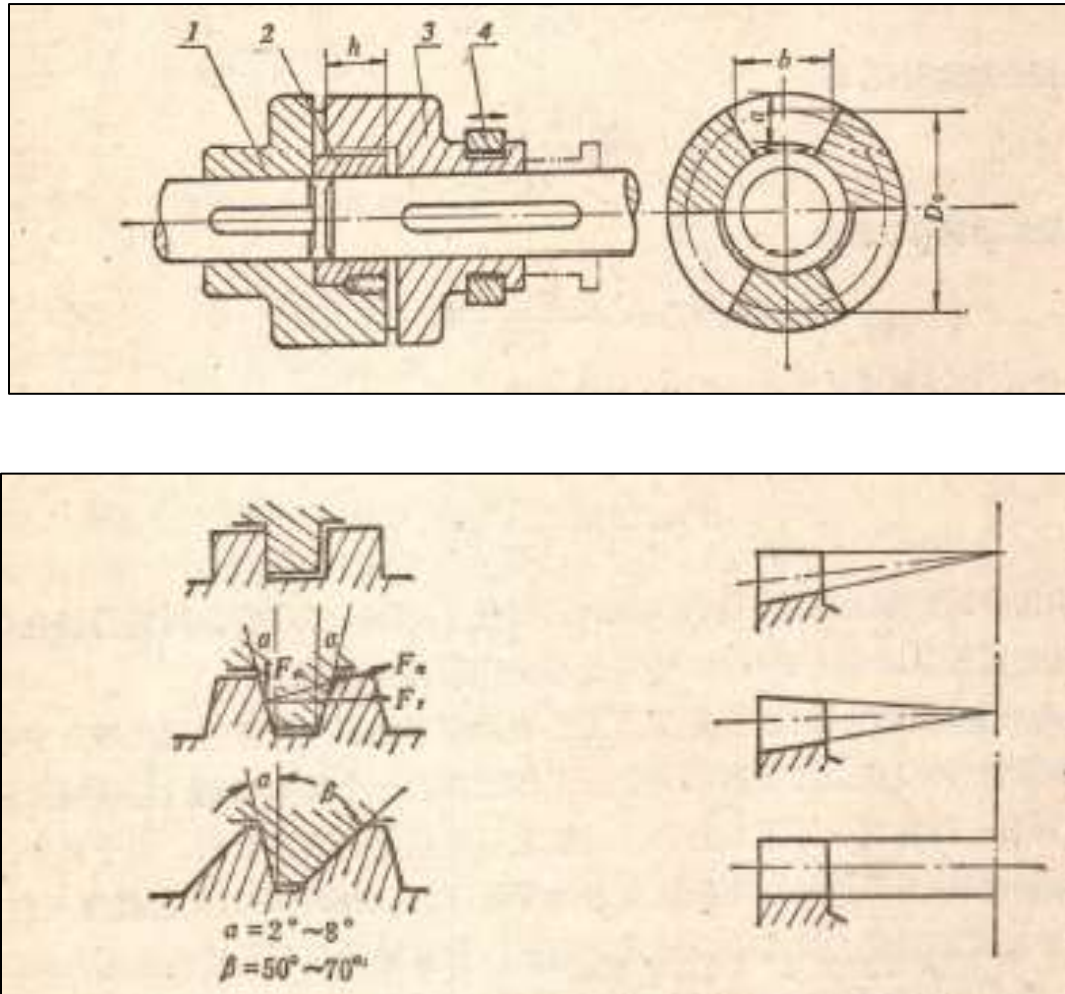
Design of toothed clutches. Top, 1&3: toothed drums, 2: shaft sleeve, 3: actuator. Bottom, three types of tooth shape designs and three alignment designs.
